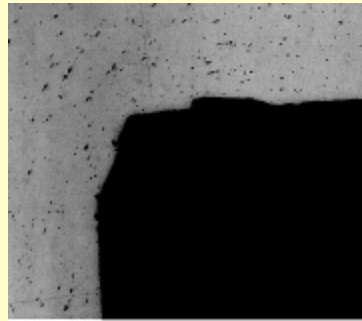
Rough area found in Sabot No. 72B outside wall, 75x
